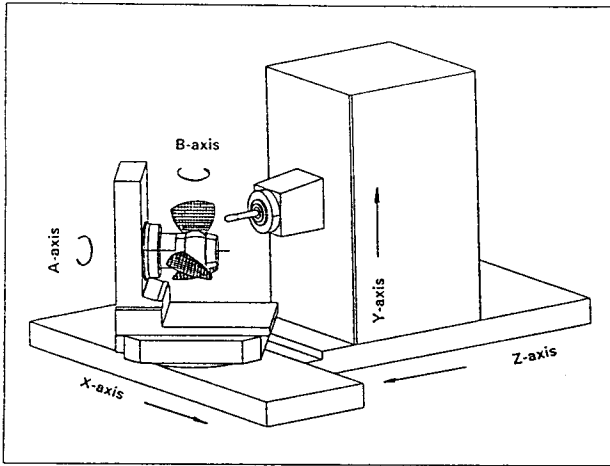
5-AXIS SET-UP FOR MILLING OF PROPELLER MODELS
